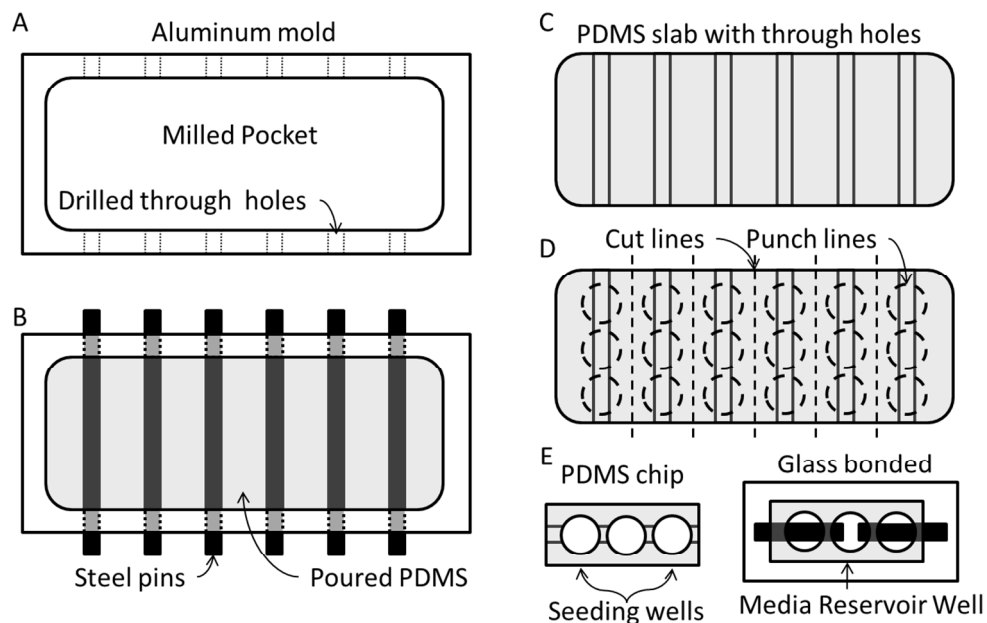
Schematic of production of PDMS permanent molds. A) A machined aluminum mold consisting of an aluminum bar with a milled pocket and several drilled through holes. B) multiple steel pins spanning the milled pocket with PDMS poured over, filling the pocket. C) A PDMS slab after removal of the steel pins, and the slab from the milled pocket. D) Cut and punch lines showing how the slab is made into individual chips. E) an individual PDMS chip, and a final device consisting of a PDMS chip bound to glass with steel pins inserted into the seeding wells.
